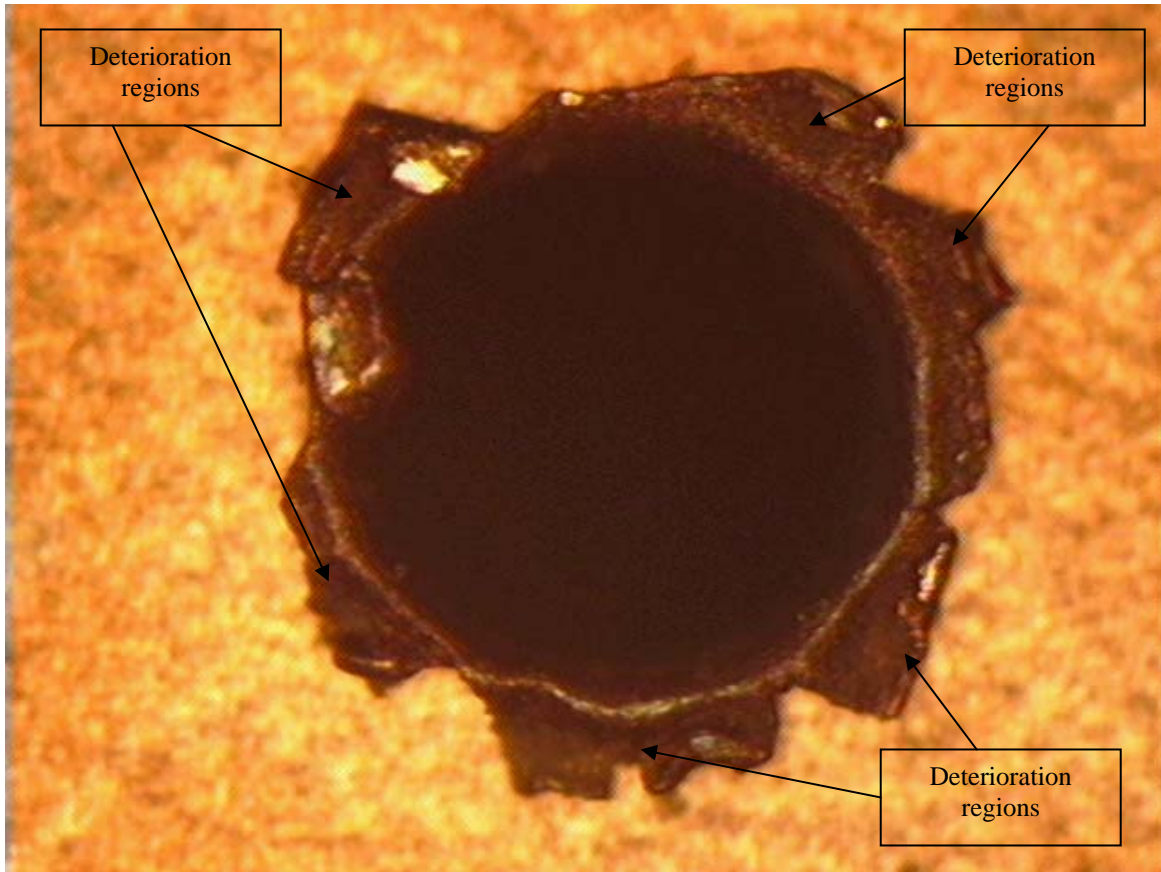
Photo of 500µm diameter hole at 290 magnification after testing
